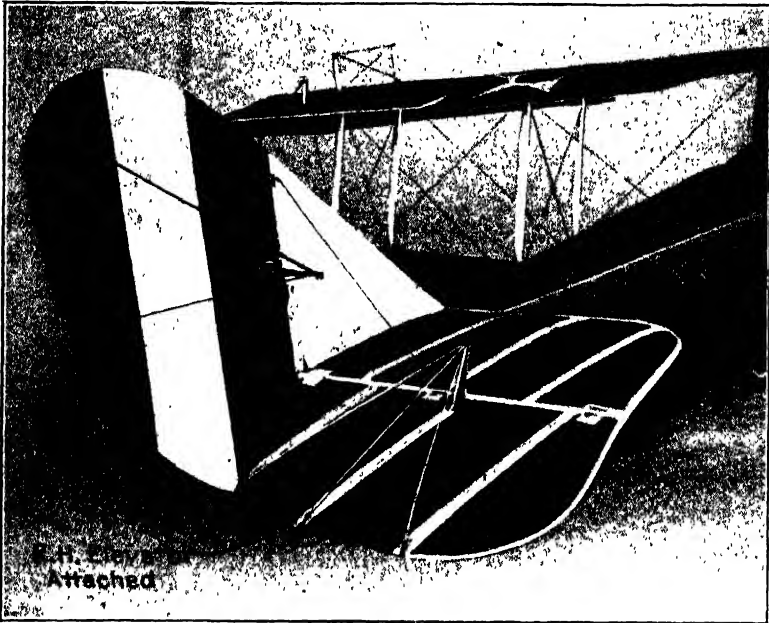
Rear View of Fuselage with Right-Hand Elevator Flap Installed.
